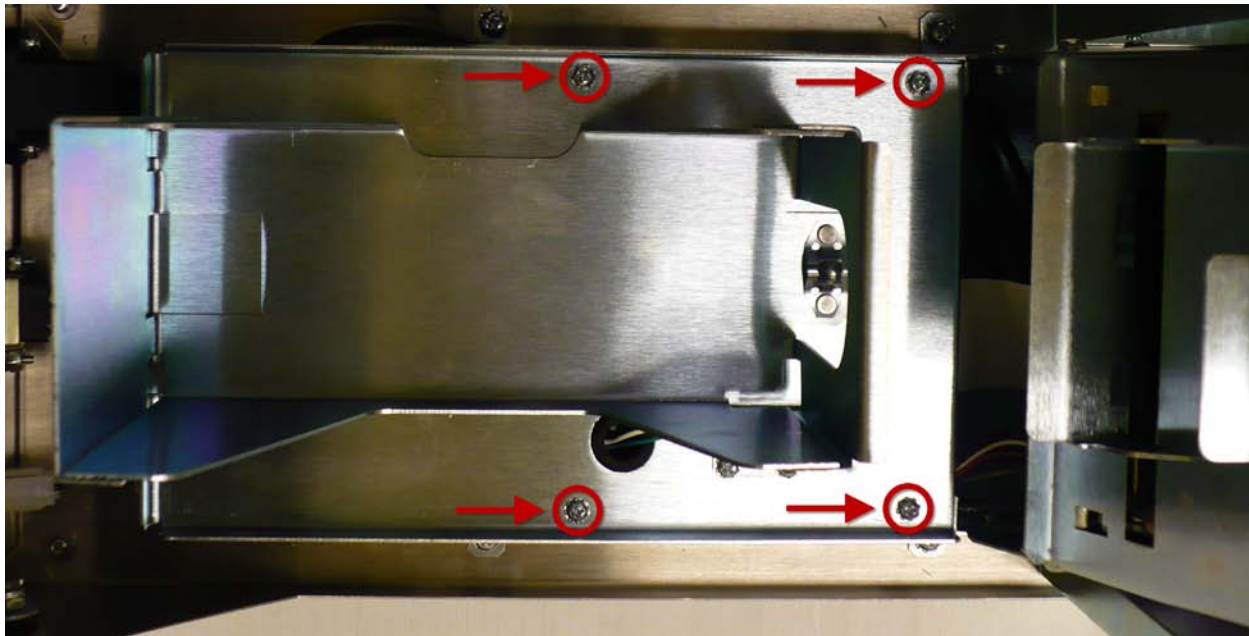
4 Screws Holding Ticket Tray Base To The Frame
